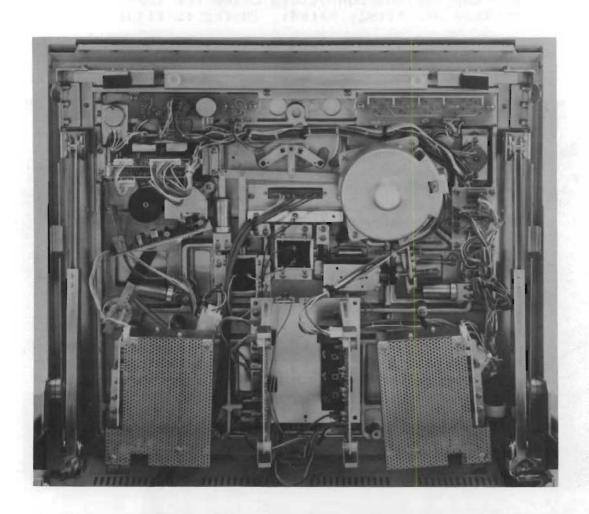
MAKE SURE THE CABLE CONNECTORS BENEATH THE TRANSPORT ARE SECURELY MATED TO THE CIRCUIT BOARD CONNECTORS
